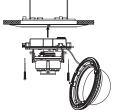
Fix the Camera to the Gang Box 4. Repeat steps 6-8 of the Ceiling Mounting section to complete the installation.
